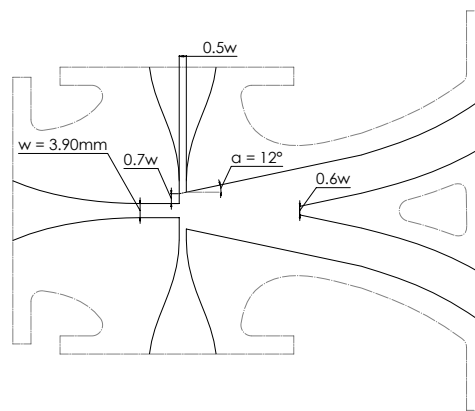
Planar schematic of the pilot's diverter switch section (cavity depth = 20 mm)
